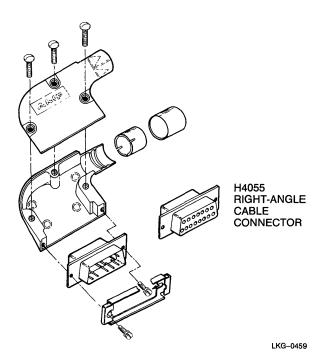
H4055 Transceiver Cable Right-Angle Connector Kit
